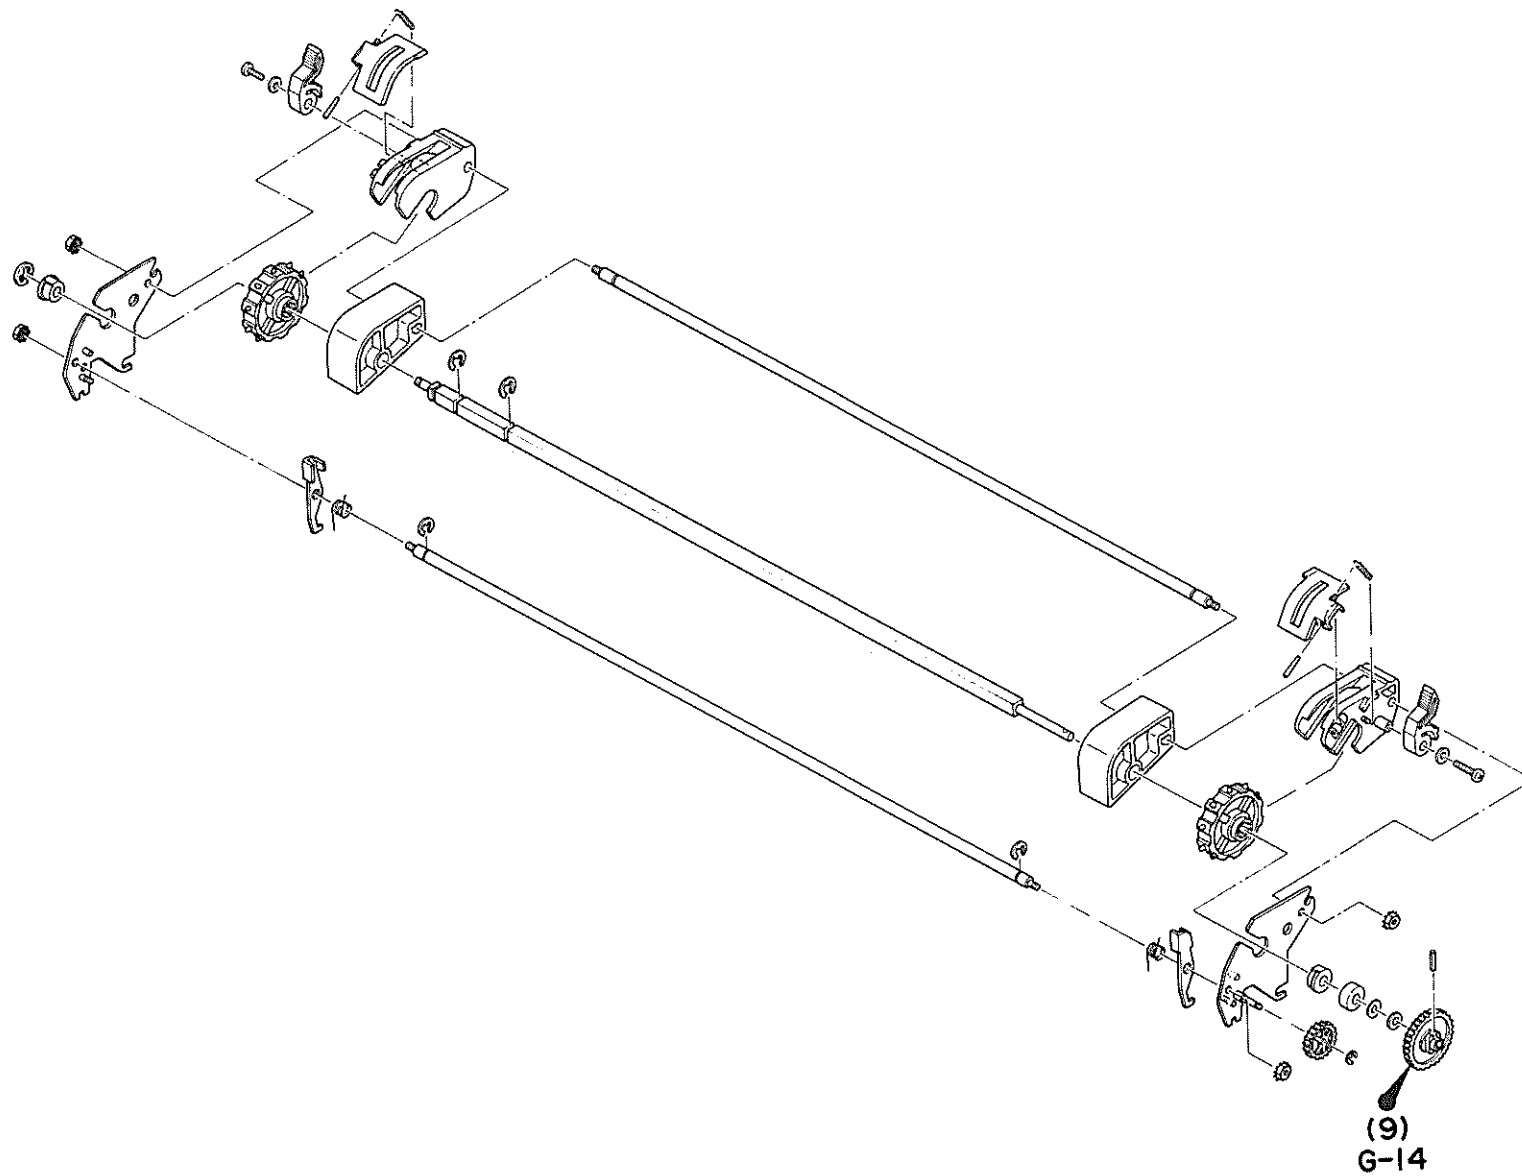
Model-3560 Lubrication and Adhesive Application Points Drawing 3
